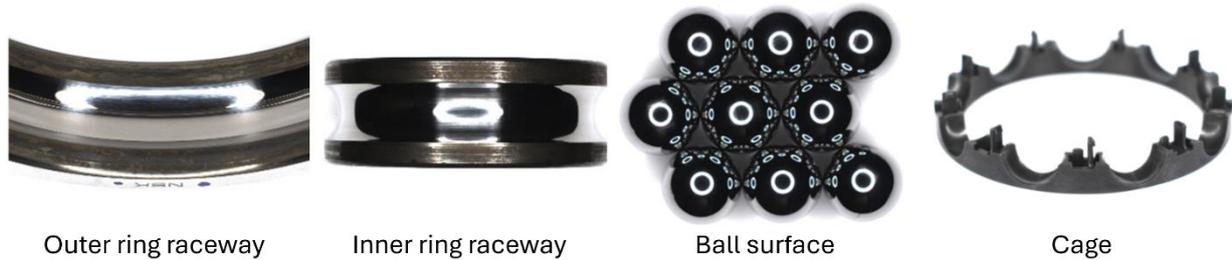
Bearing condition after high-speed rotation test (dmn 2.14 million)
